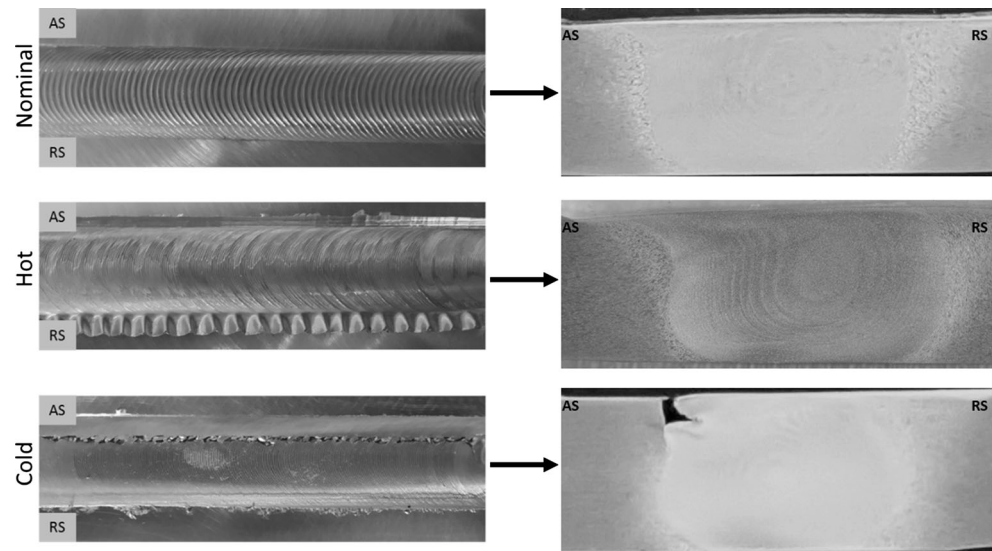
Plan surfaces (left) and transverse sections (right) of a nominal, hot, and cold weld specimen
